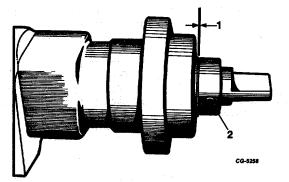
Checking Distributor Shaft End Play (Thrust Washer-to-Thrust Collar Clearance) (Typical)
